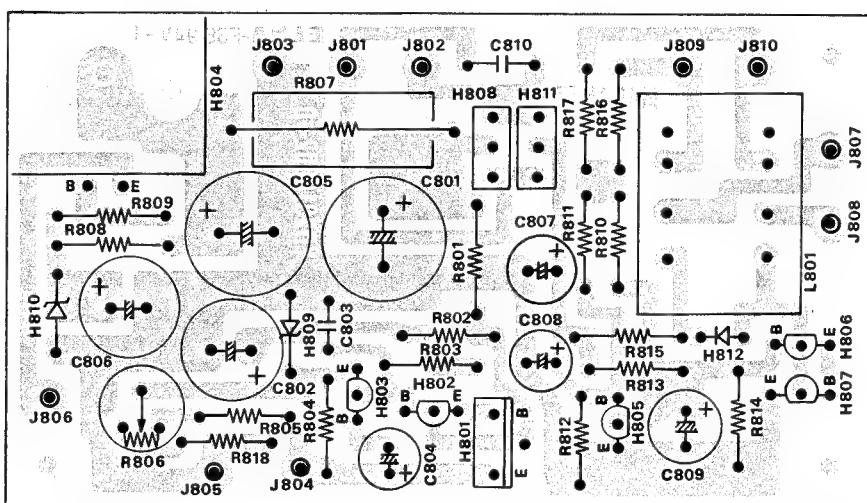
Power Supply and Protection Relay Circuit Assembly P800 Component Locations
